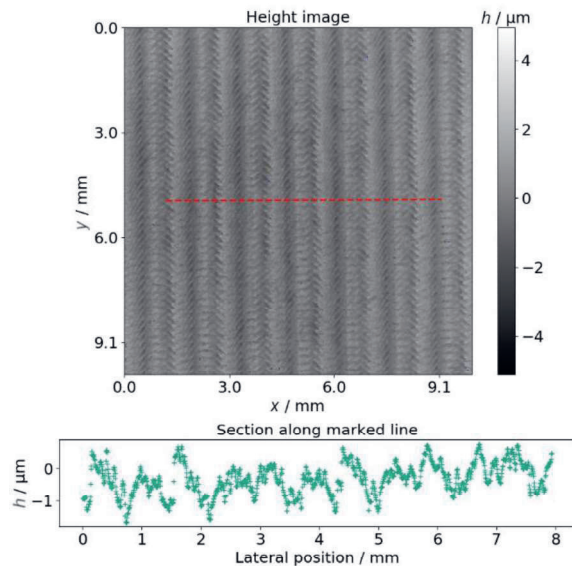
Milling surface machined with an end mill under 5.5 mm axial infeed alternate milling.
